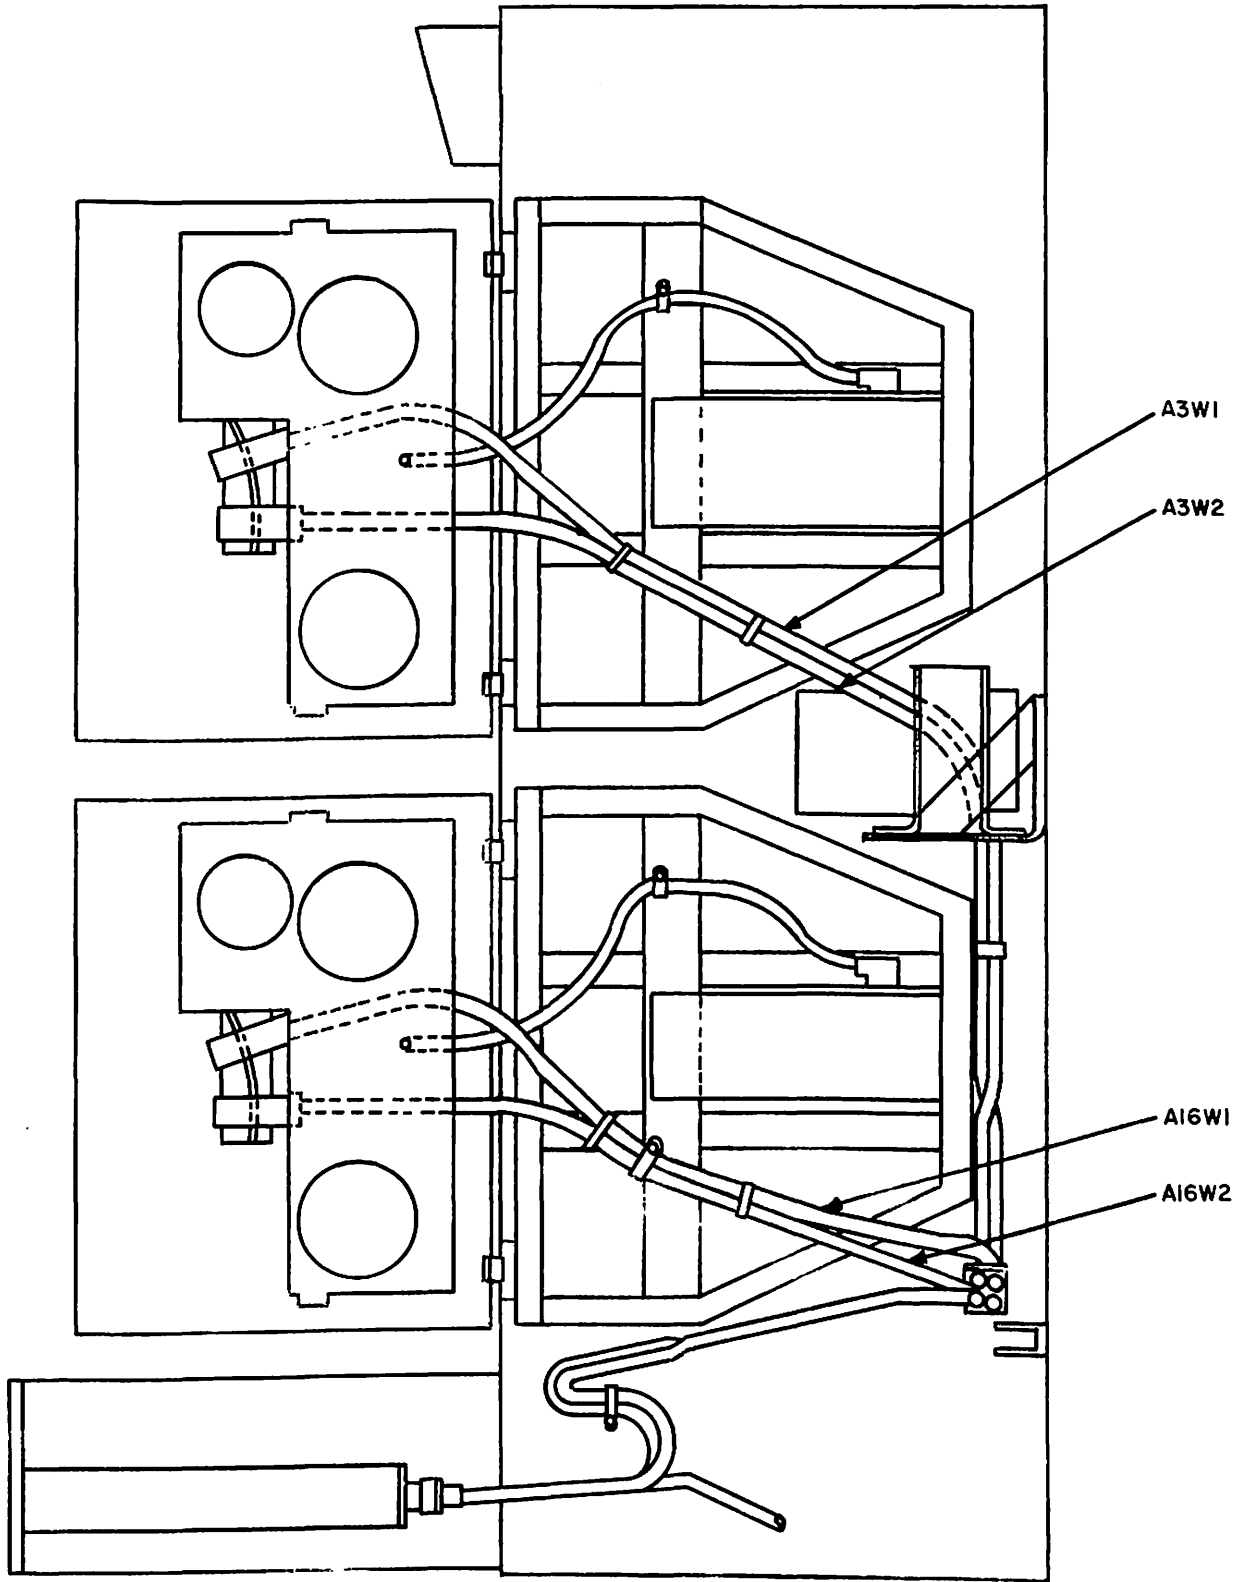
Magnetic Tape Unit, Handler Power Supply Cables
